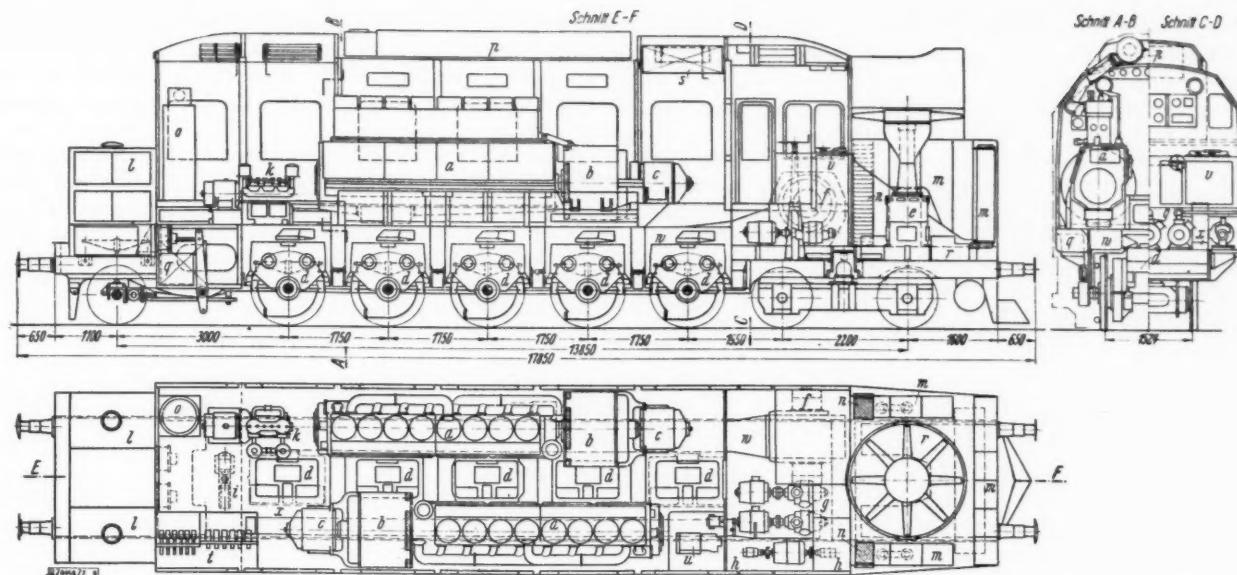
SECTIONS OF THE DIESEL ELECTRIC LOCOMOTIVE BUILT BY KRUPP FOR RUSSIA (All the Dimensions Are in Mm)
